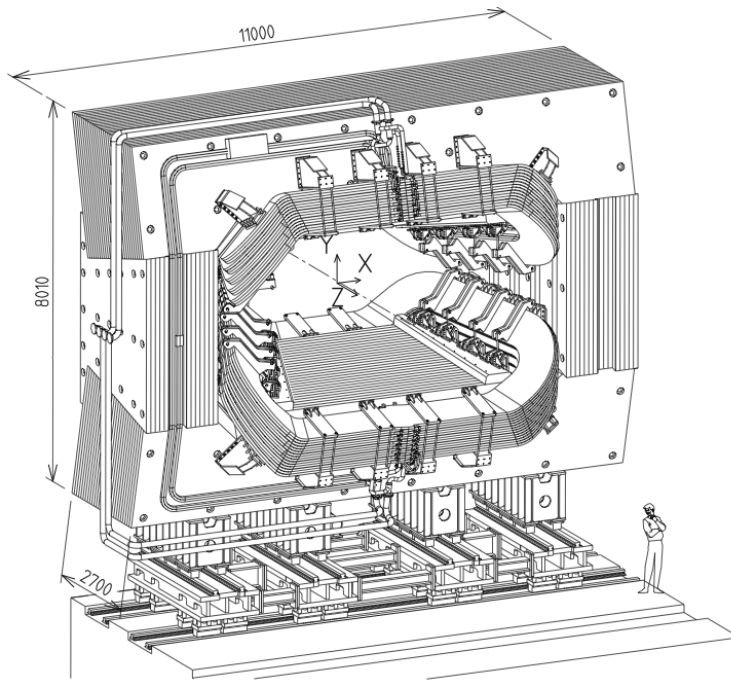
The LHCb Dipole Magnet [51], dimensions given in millimeters.
